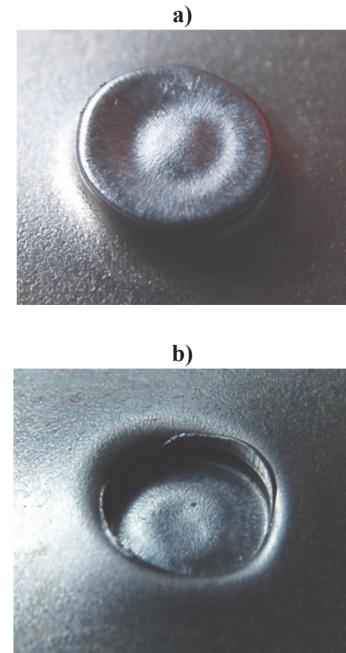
View of clinched joint after pull-out test: top sheet (a) and bottom sheet (b).
